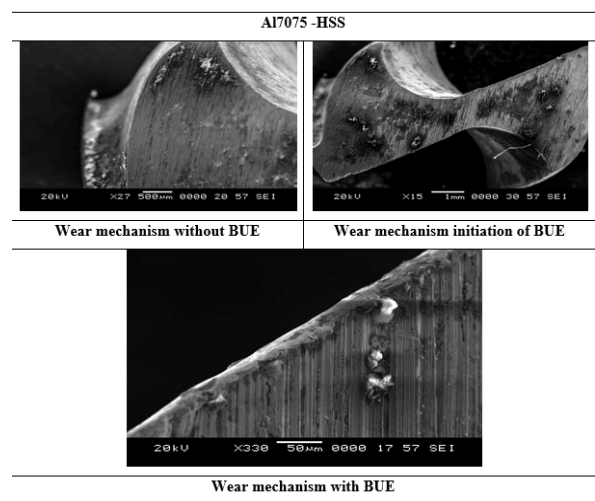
Tool wear mechanisms while Al7075 drilled with high-speed steel drill
